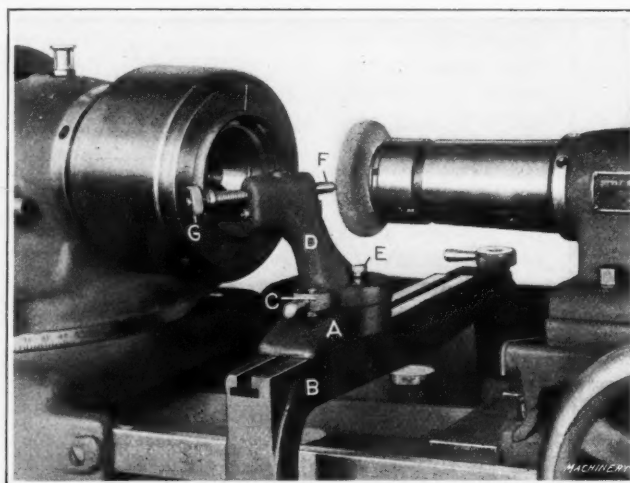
Radius Wheel Truing Device for Use on Heald Internal Grinding Machines
